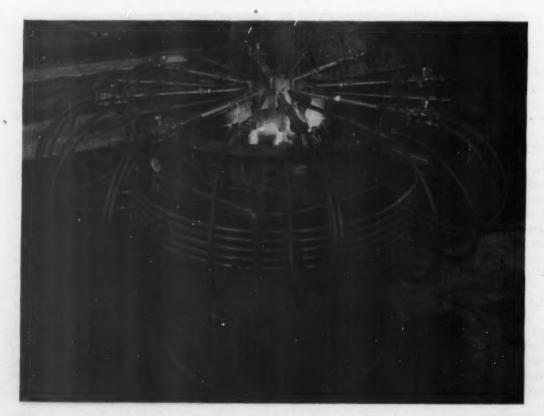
Multiple flamehead machine hardening wearing surfaces on gun-mount roller. Sprocket and chain device swings flame heads out of way for loading
